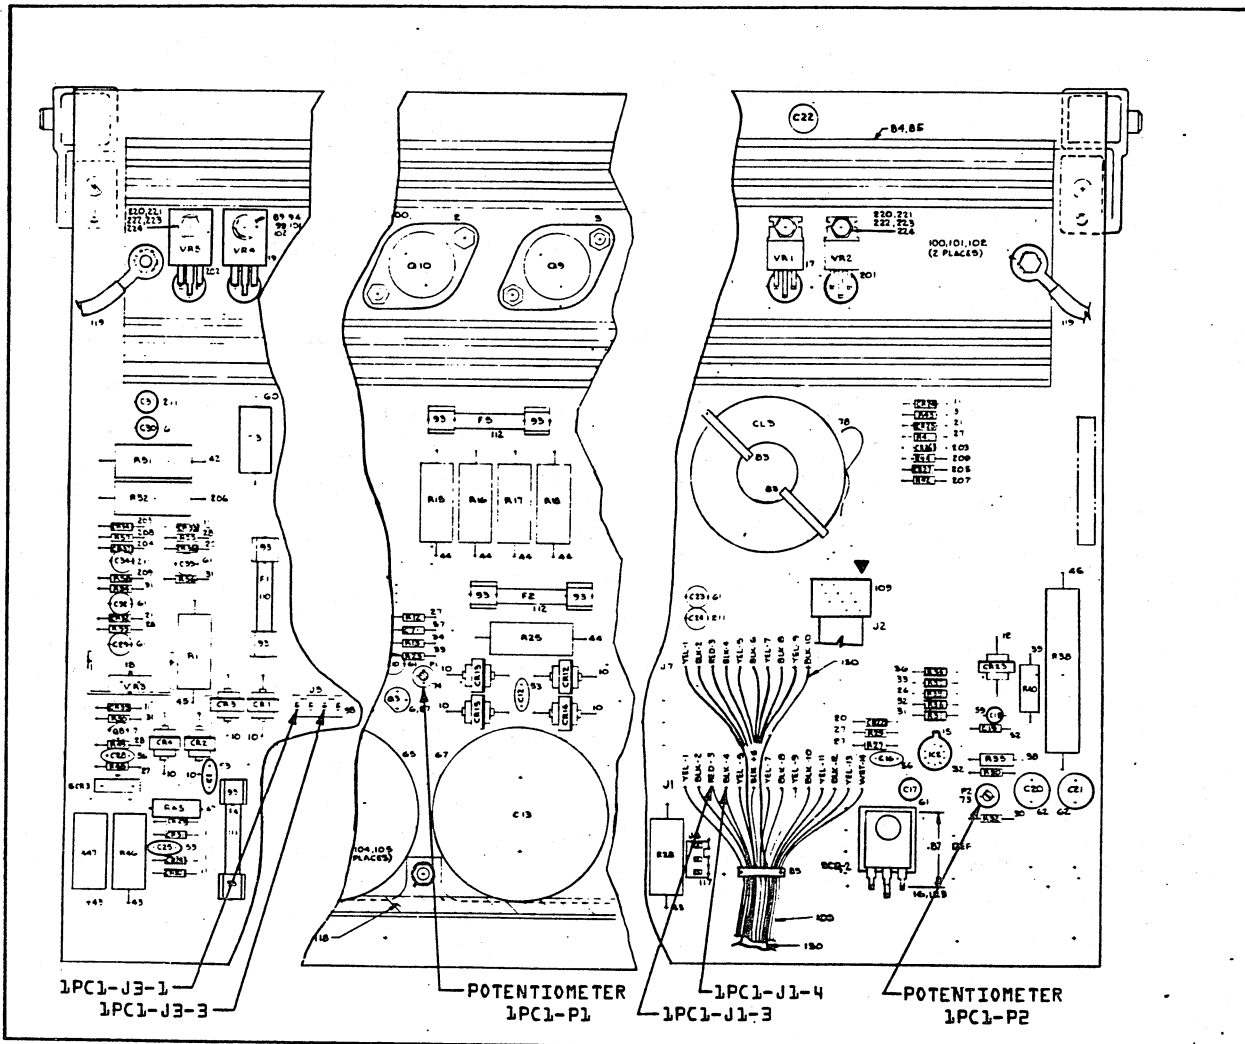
POWER SUPPLY BOARD ASSEMBLY (CARD LOCATION 1PC1)
